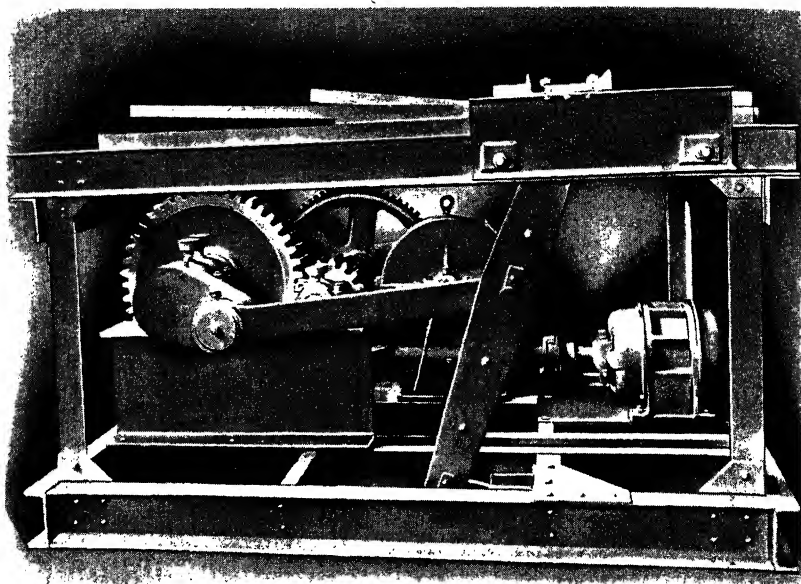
Pusher type conveying mechanism. (Courtesy W. S. Rockwell Company.)
